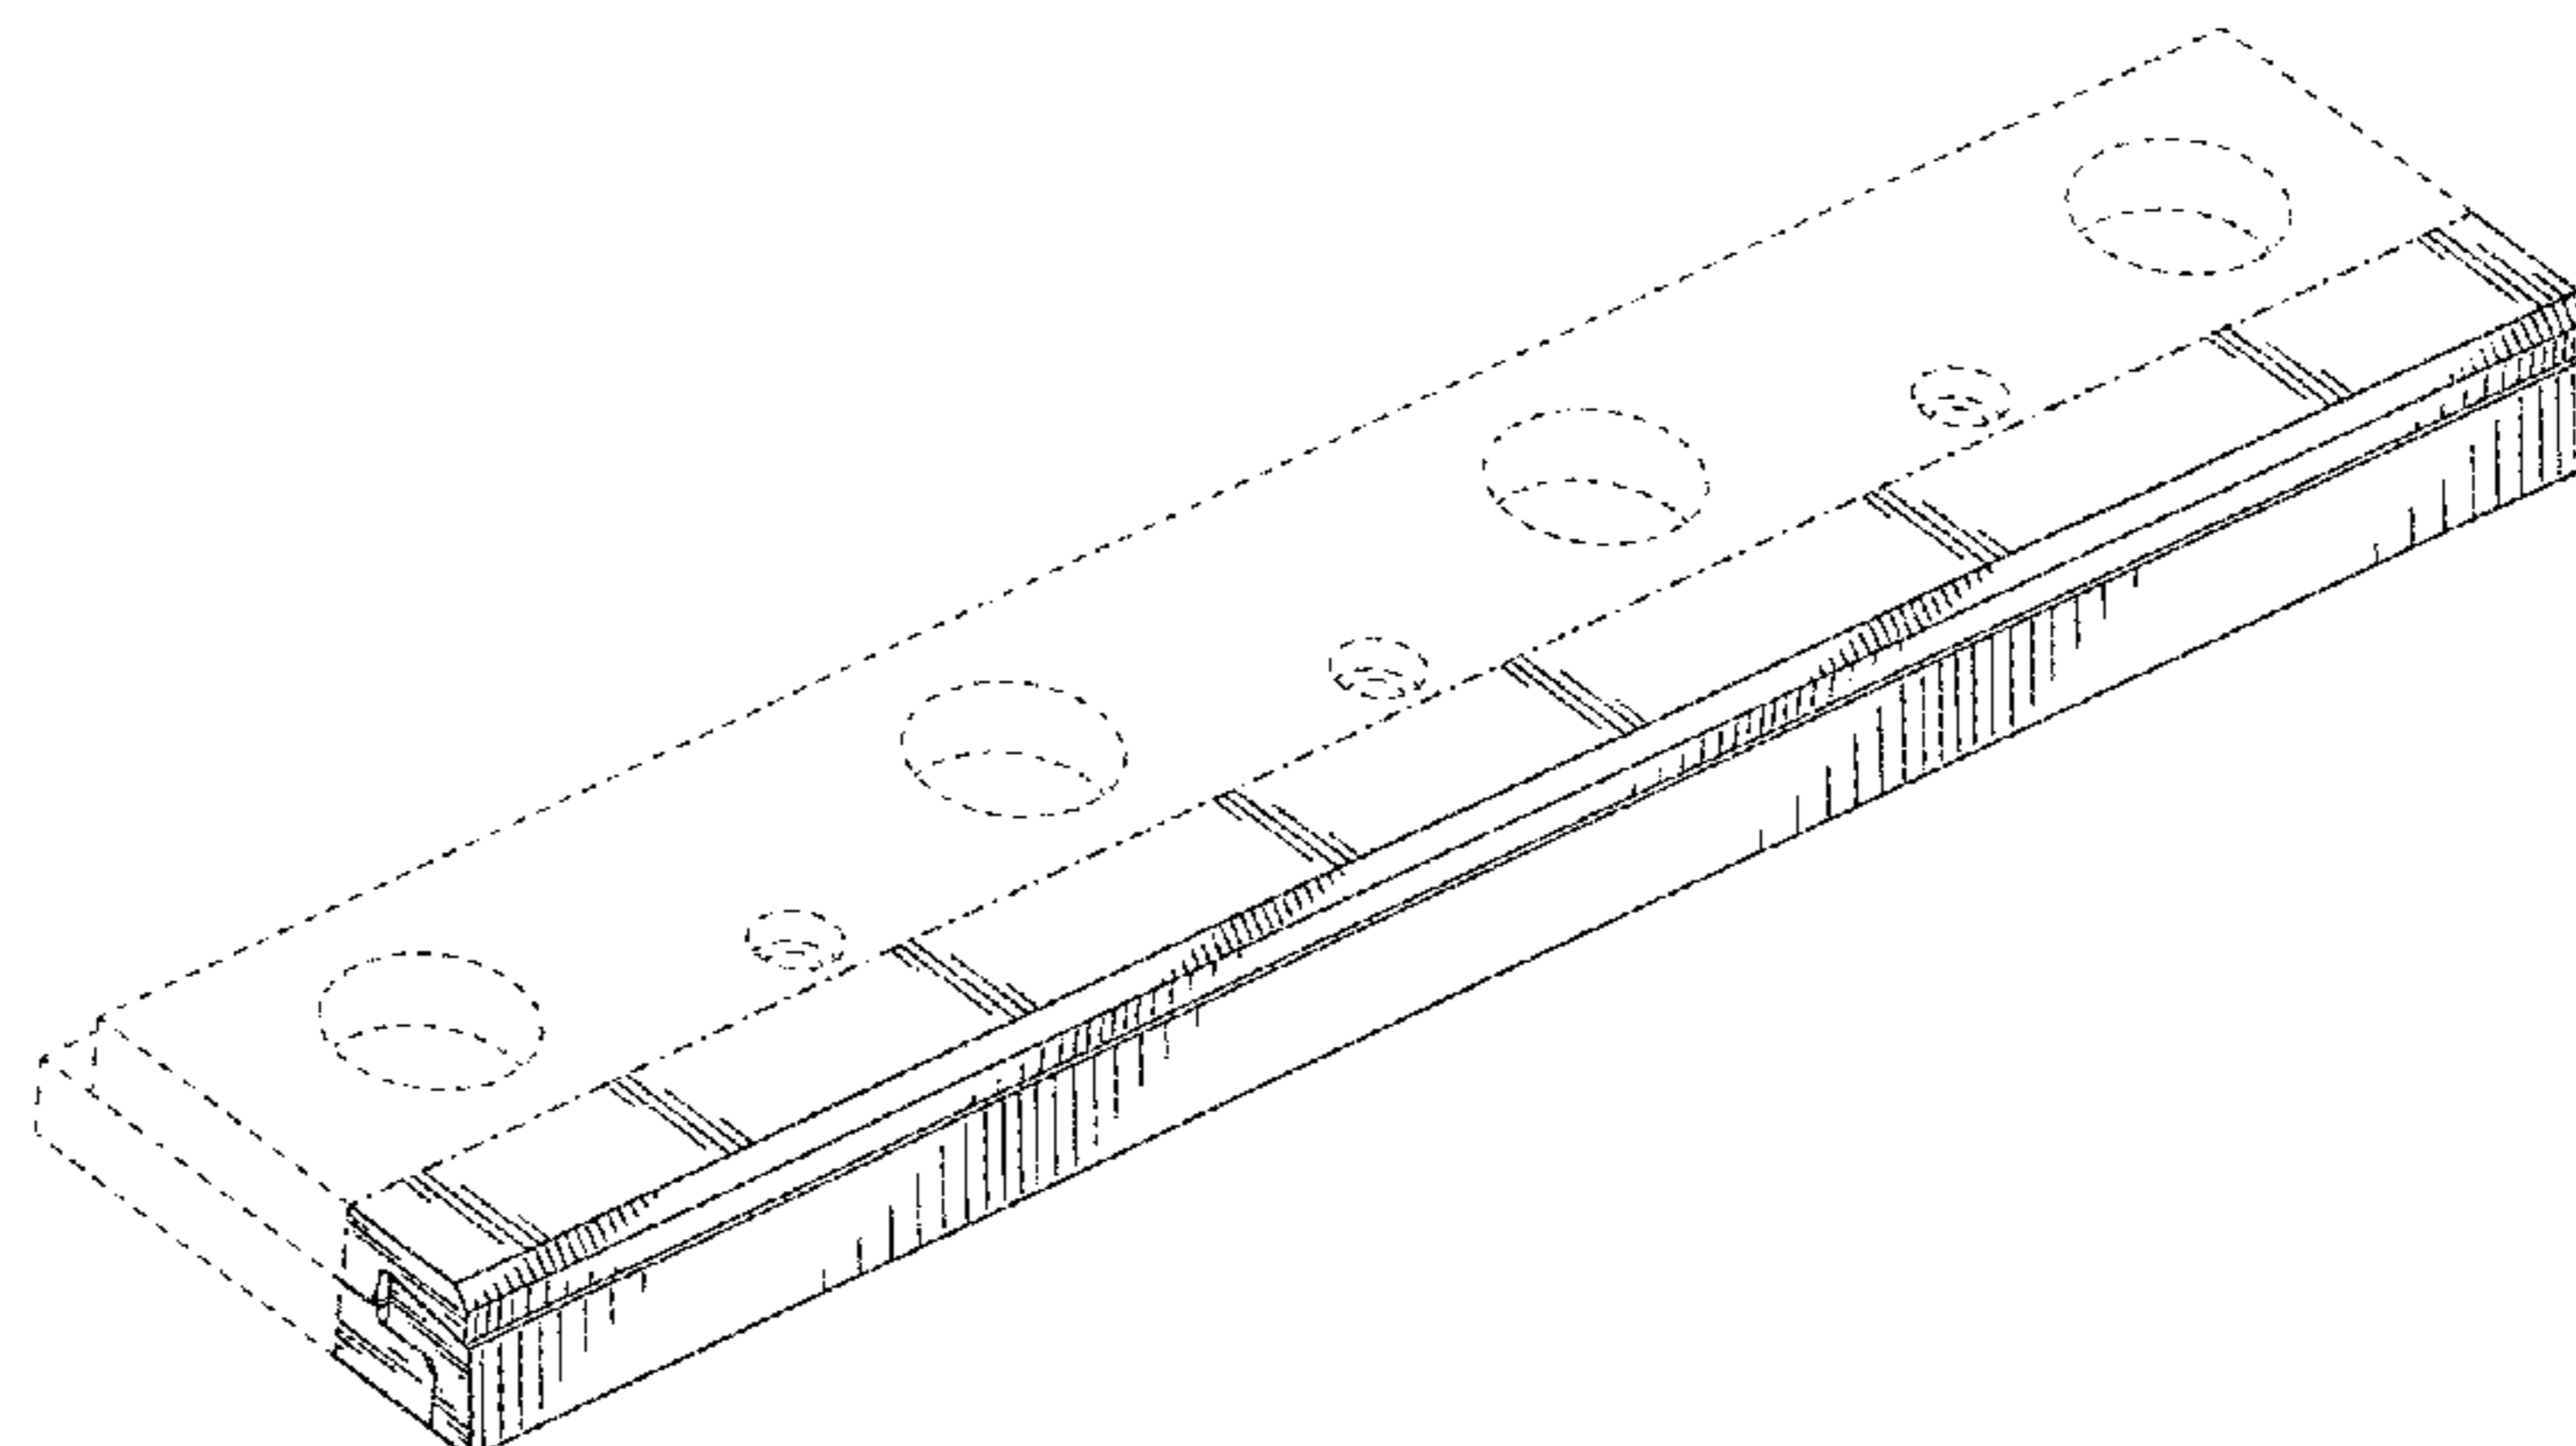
is a rear view of the knife assembly of FIG. 15.
